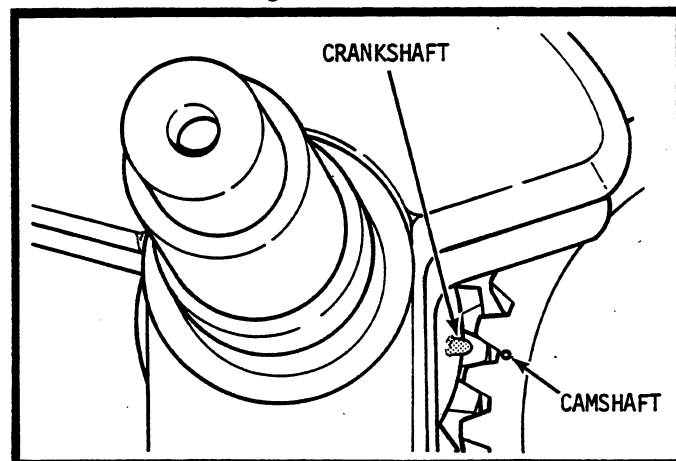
TIMING MARKS ON CRANKSHAFT-CAMSHAFT
